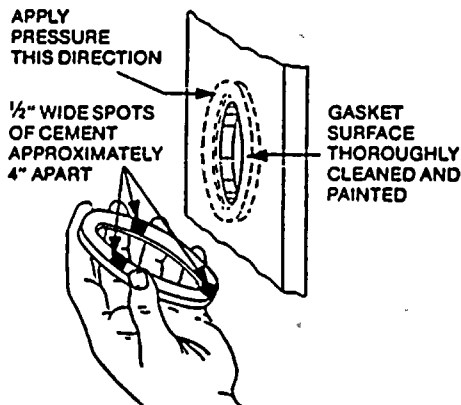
Spot cementing rubber gaskets to vertical and bottom surfaces.
